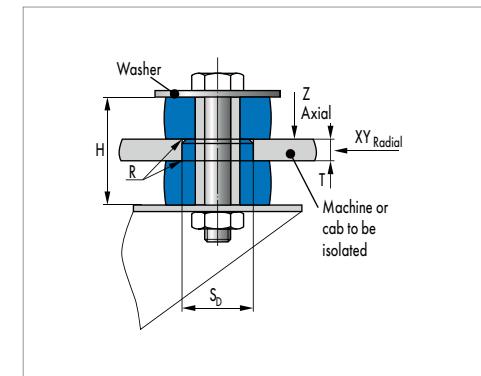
Fitting & installation instructions: MO Mount with load directions
